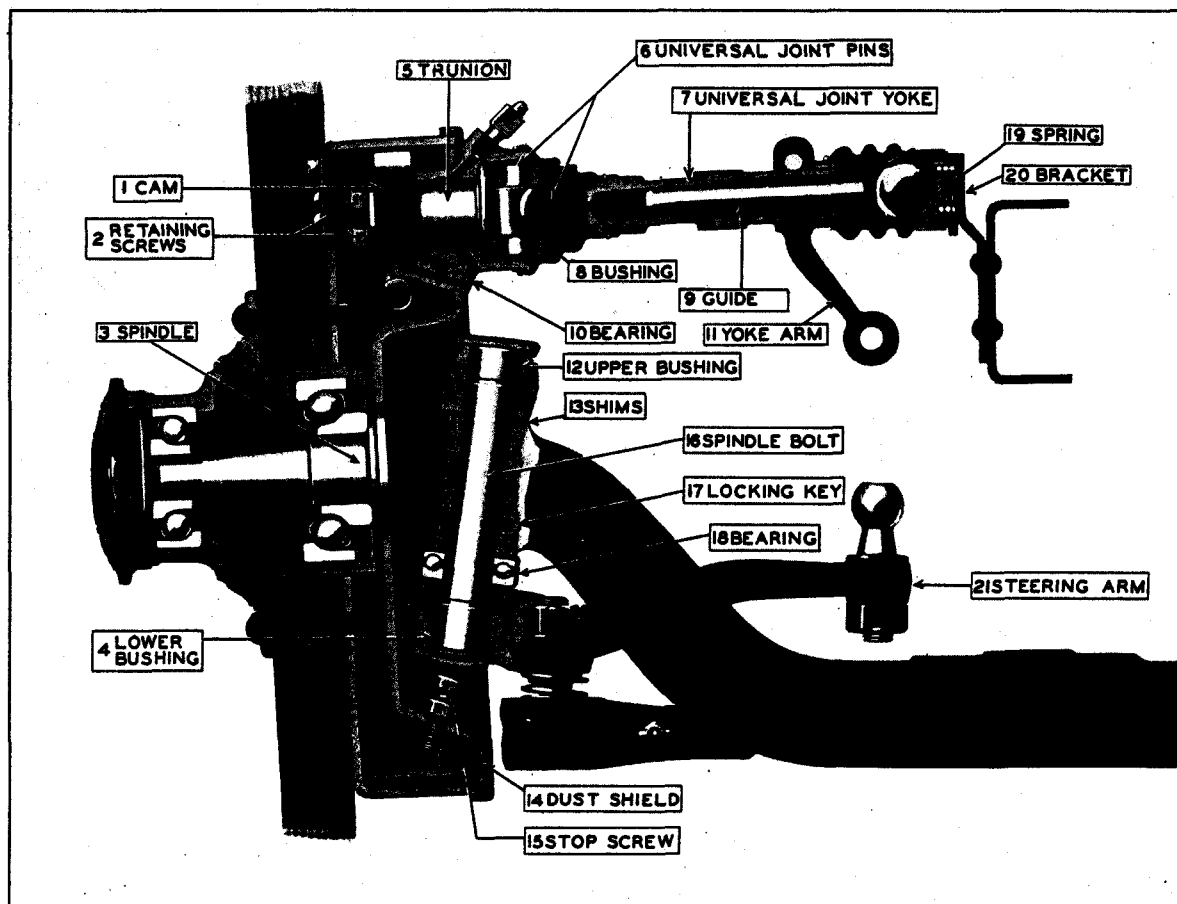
Sectional View of Left-Hand Front Spindle and Wheel
